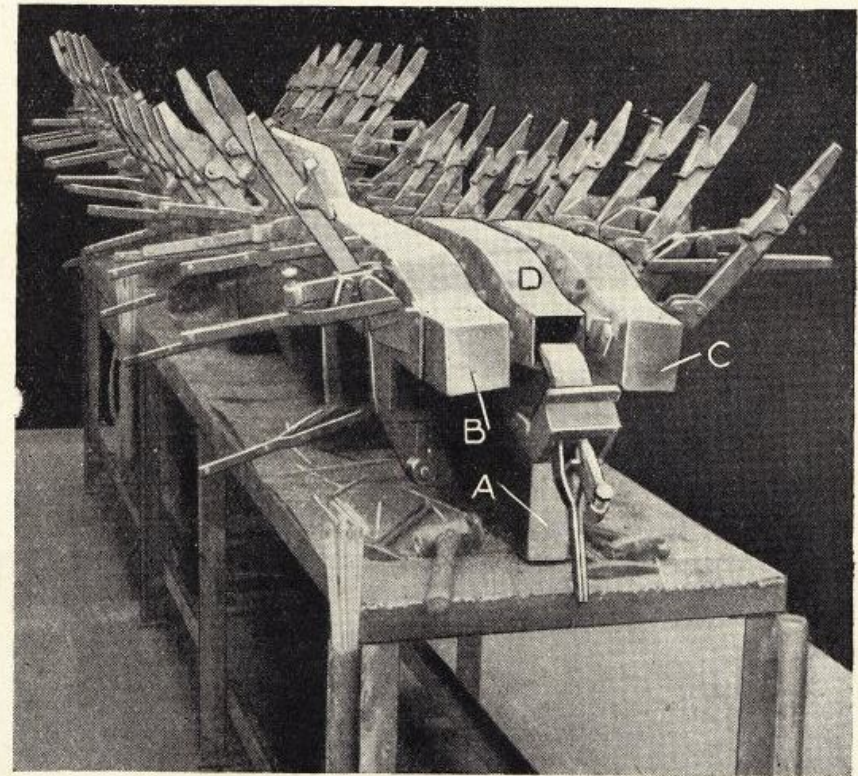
Magnetic Jig employed for Tack Welding the Top Plates to the Side Plates of the Box-type Main Chassis Frame Members. Electro Magnets serve to Hold the Side Members of the Jig to the Work
